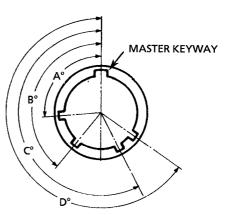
PHYSICAL DIMENSIONS (CONTINUED)
